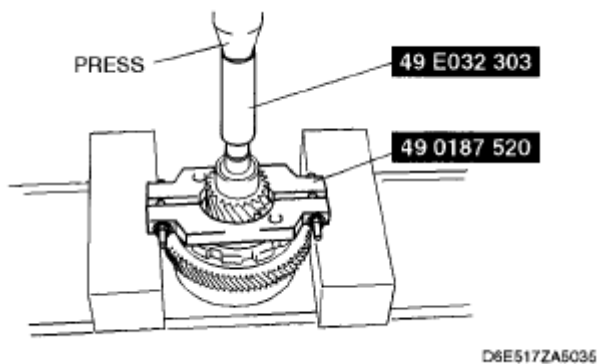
Removing Output Gear And Inner Race From Secondary Gear
